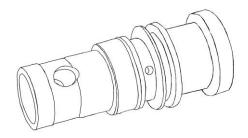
Drawing of Control Valve for Variable Displacement Air-conditioner Compressor
